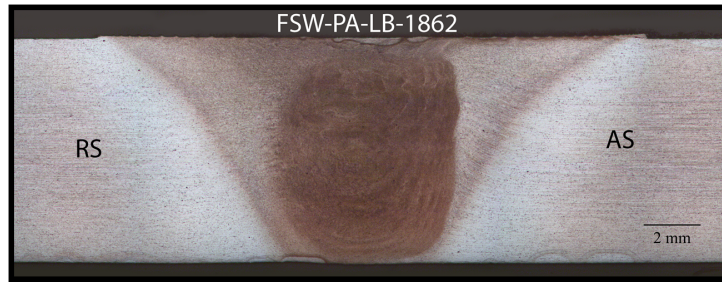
Macrograph of the weld FSW-PA-LB-1862 (30 kN).
